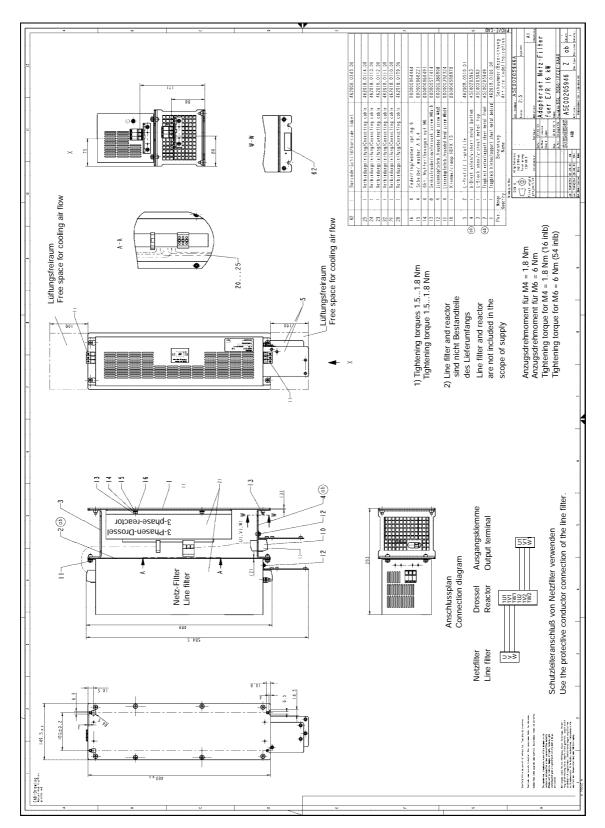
Adapter set, line filter for I/R module 16 kW, 6SL3060-1FE21-6AAx; dimension drawing
